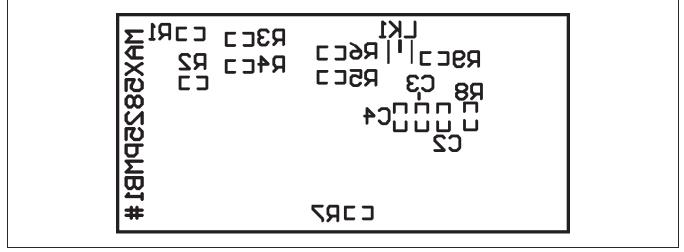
MAX5825PMB11 Peripheral Module Component Placement Guide—Solder Side
